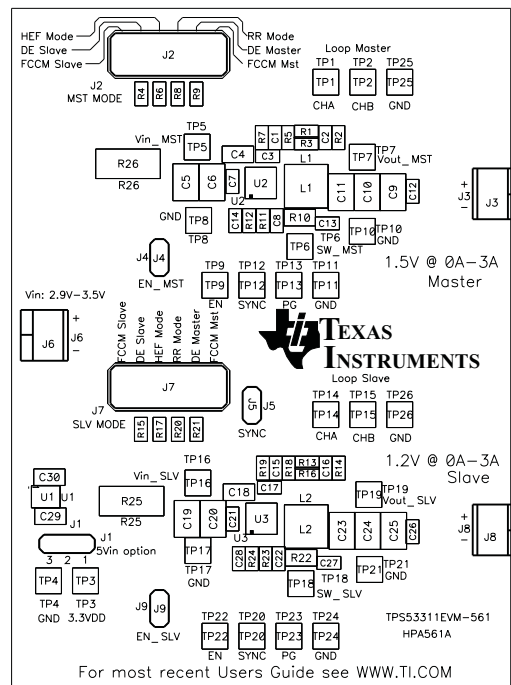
TPS53311EVM-561 Top Layer Assembly Drawing, Top view
